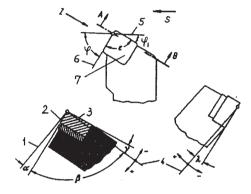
Angles characterizing the cutting blade geometry , where: L – plane of the cutting edge of the tool; 2 – flank; 3 – chip surface; 4 – plane parallel to the basic plane of the tool; 5 – working plane; 6 – main cutting-edge setting plane; 7 – quick-changeable cutting insert; α – back angle; β – wedge angle; φ – main setting angle; ε – apex angle; λ – inclination angle of the main cutting blade; φ 1 – auxiliary setting angle.[21].
